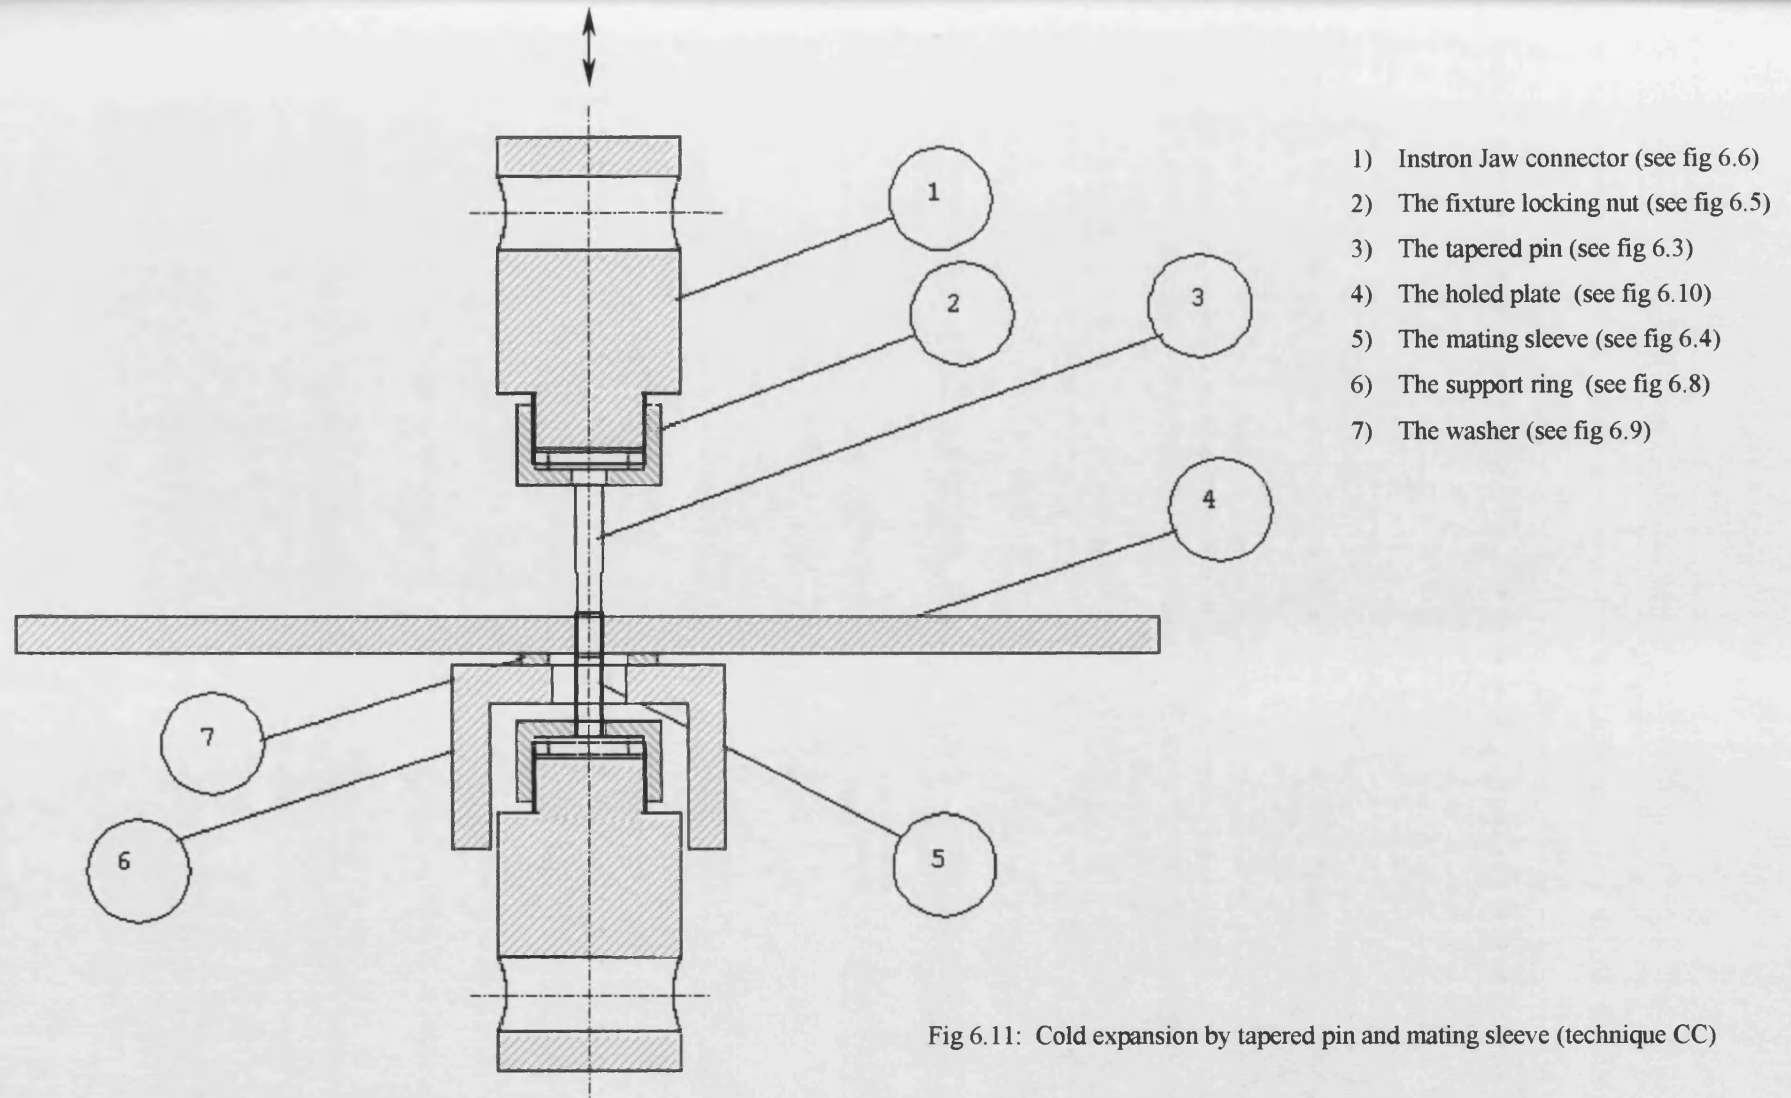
Cold expansion by tapered pin and mating sleeve (technique CC)
